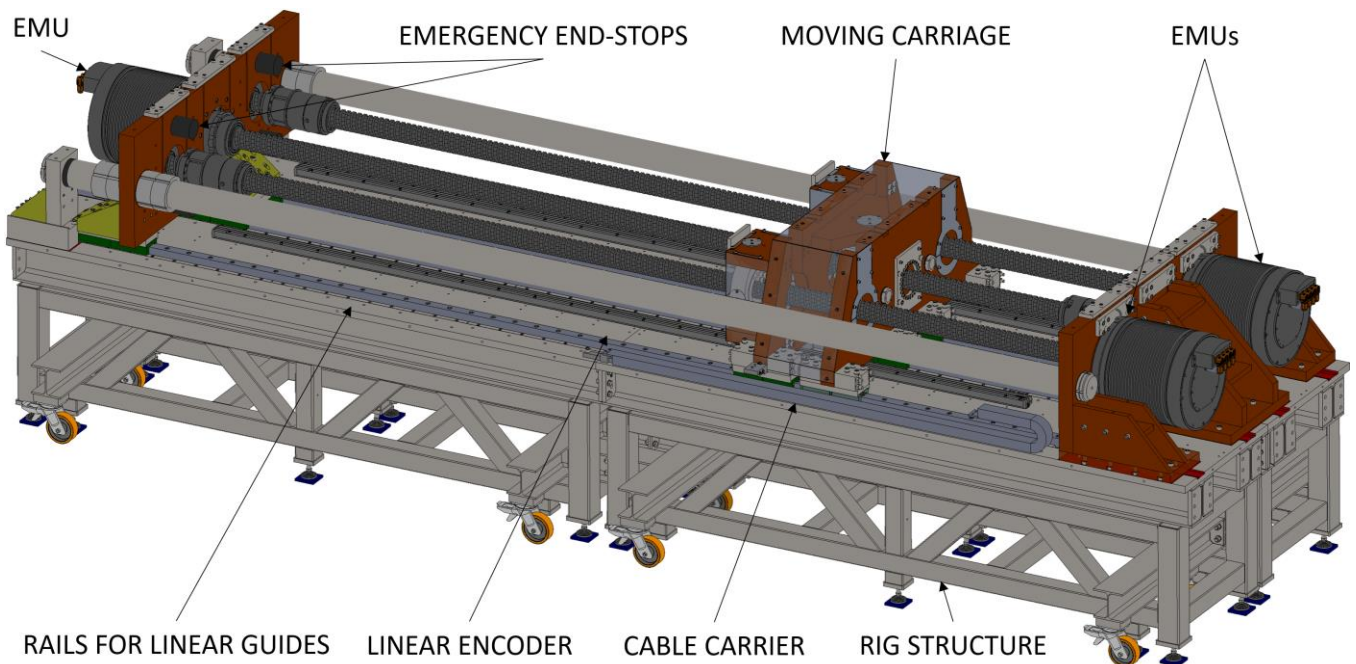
HIL test rig mechanical assembly (3D view from CAD).
